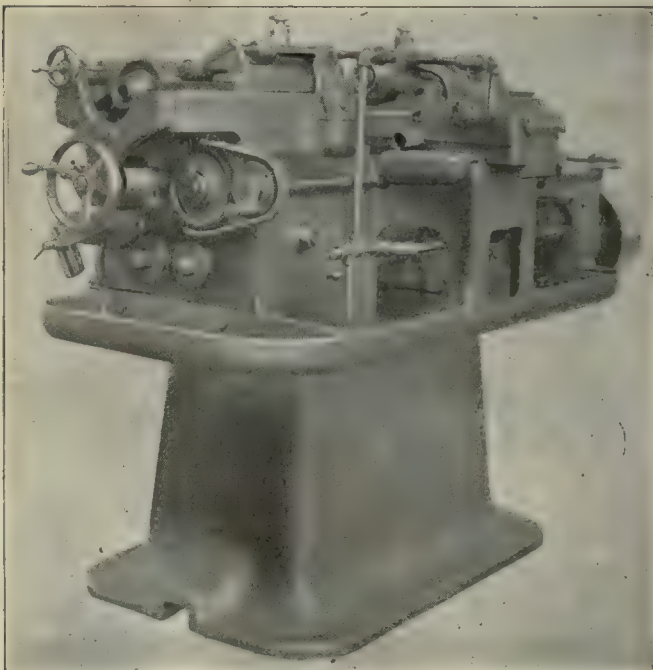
TAYLOR & FENN SPLINE MILLING MACHINE
